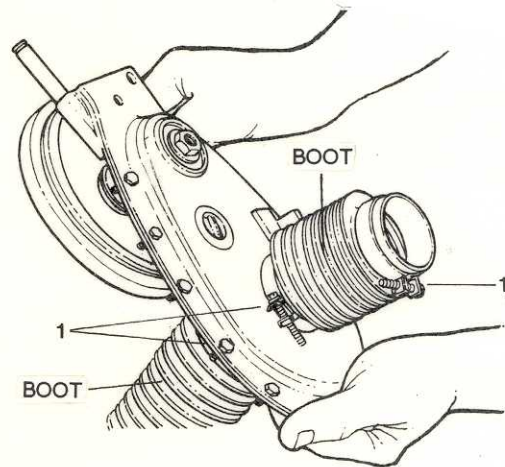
PRIMARY CHAIN CASE DISASSEMBLY
